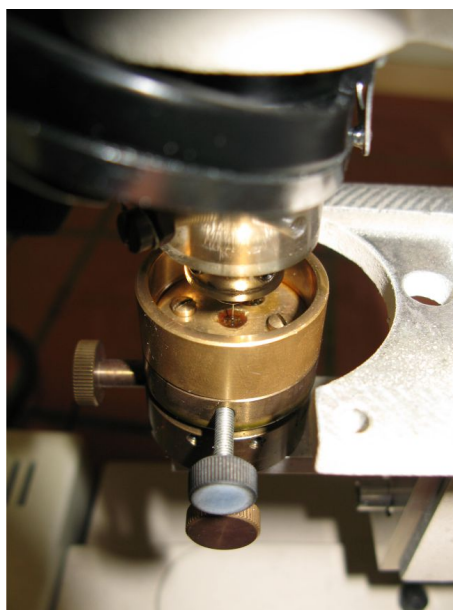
Gasket holder with gasket mounted to the spark eroder in the process of drilling a hole.
